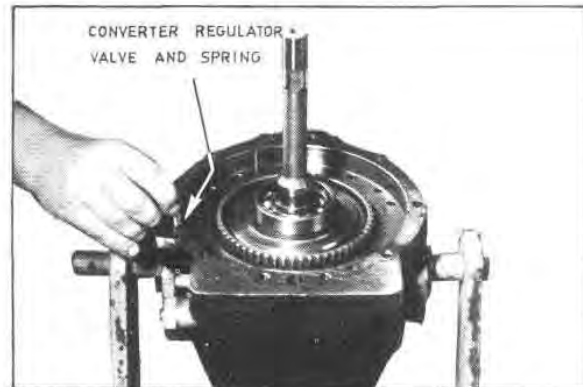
Assembling the Converter Regulator Valve and Spring
